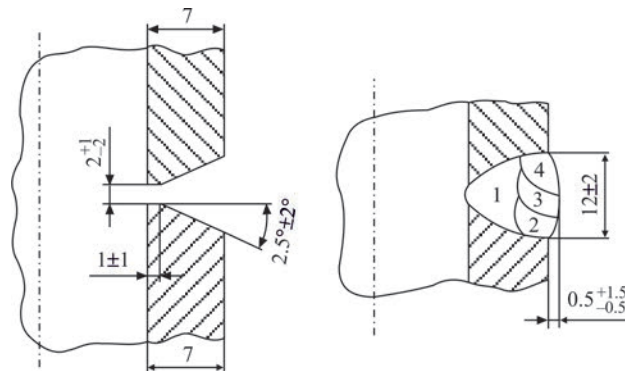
Preparation of single U-type groove for pipe welded joints (SMAW welding process) (a), predicted weld configuration and layout of weld beads (b)
